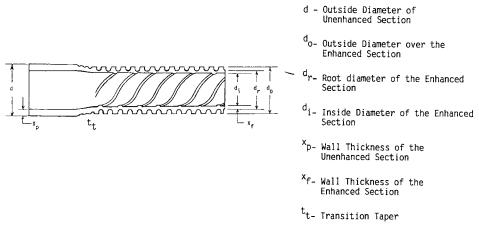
Outside Diameter and Inside Diameter Enhanced Tube Nomenclature
